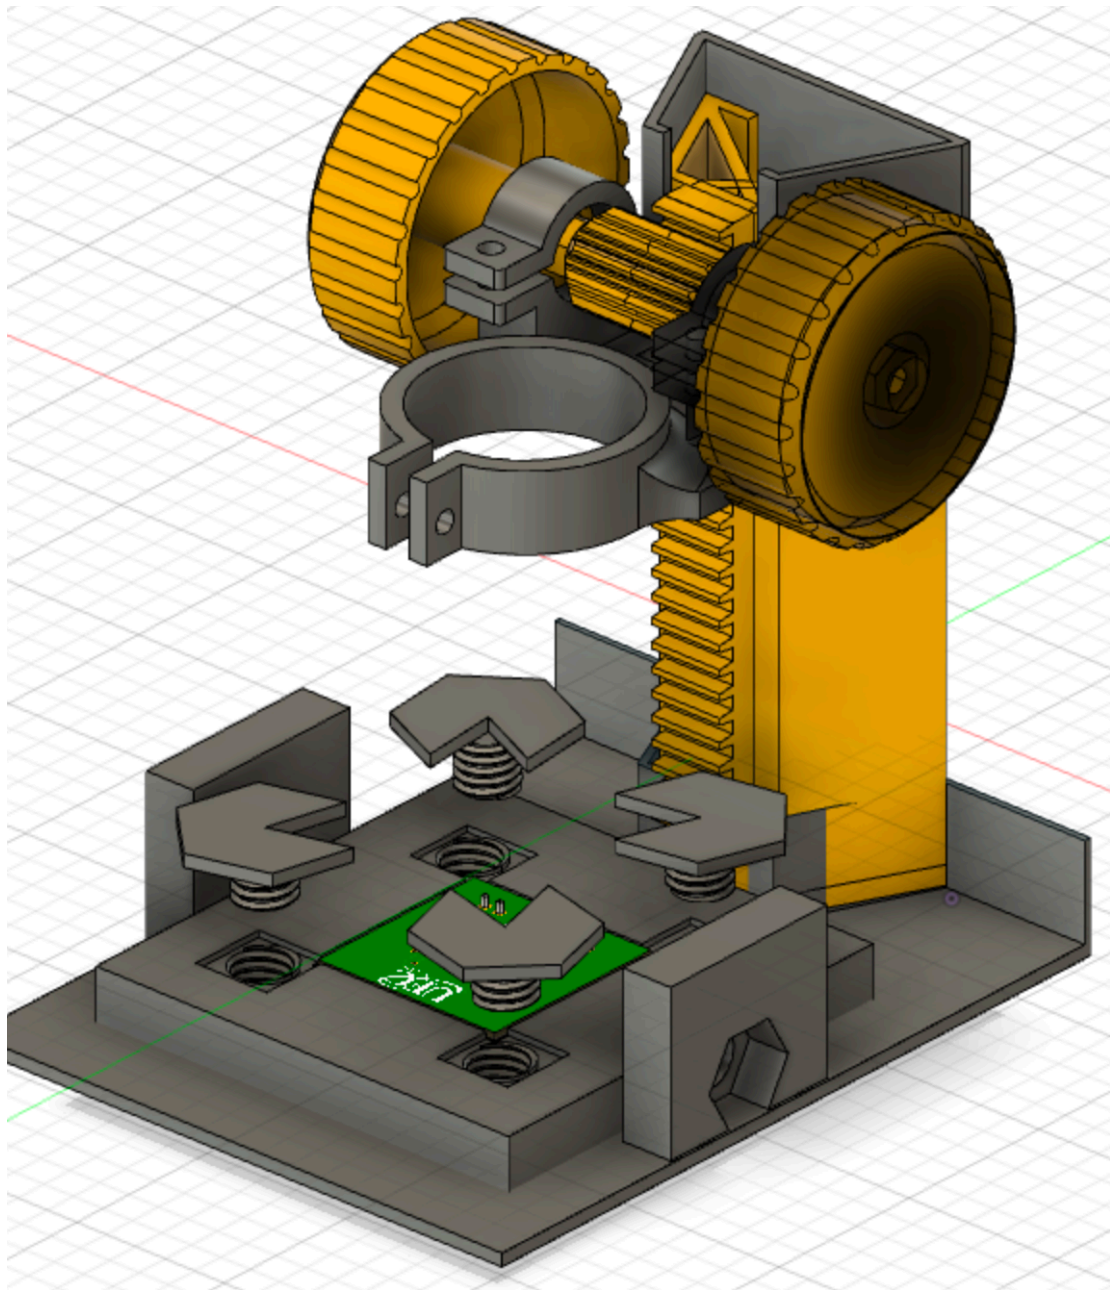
A CAD design of the miniaturized optical setup. The 3D printed chip holder described in section 4.4 as well as the PCB are placed on the stage of a 3D printed microscope. The setup allows adjustment of the focus as well as adjustments to the position of the chip holder with a hexagonal nut and bolt mechanism.
